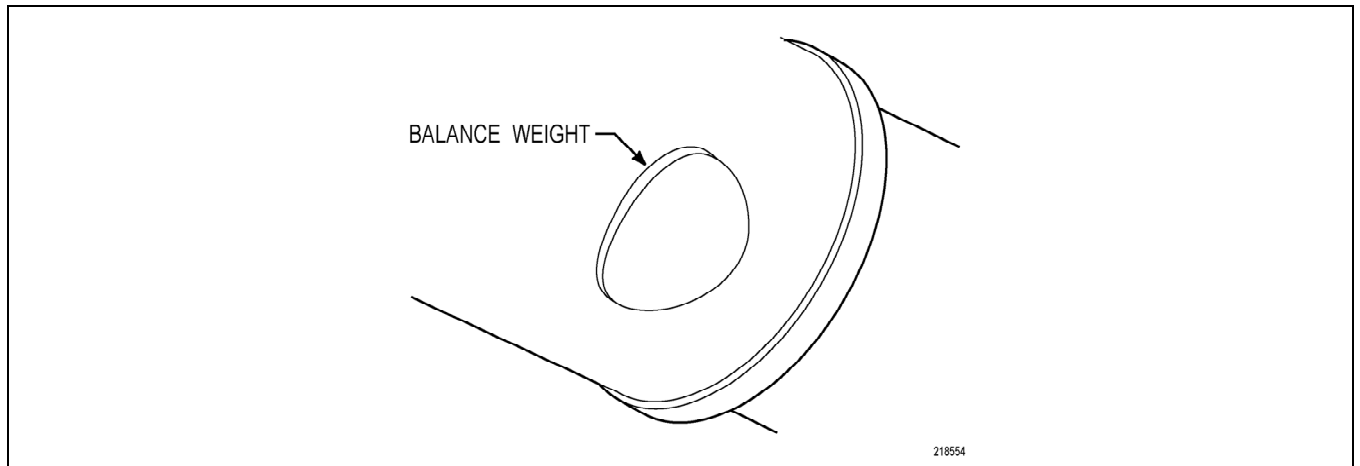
Inspect Driveshaft for Missing Shaft Weights
